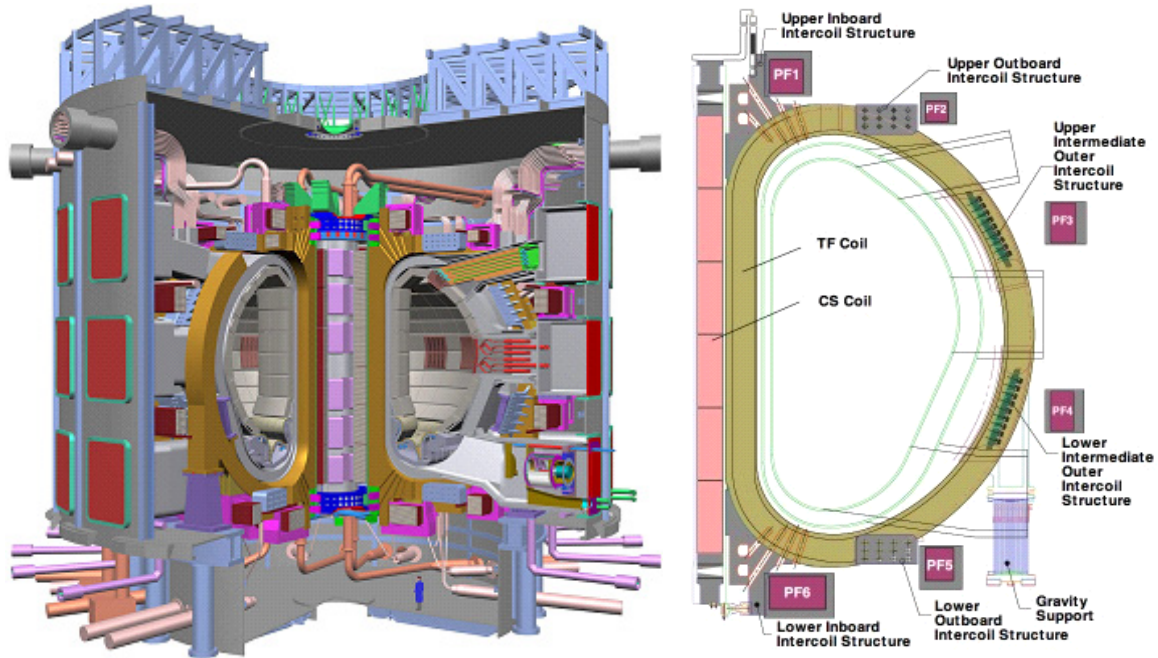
Cut-away of ITER (left) and the magnets system of the machine (right) [1.11].
